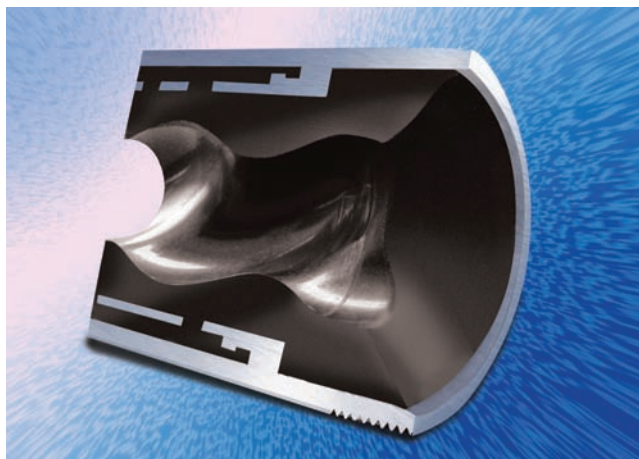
The Moyno HTD350 stator elastomer is mechanically secured to the stator tube.
